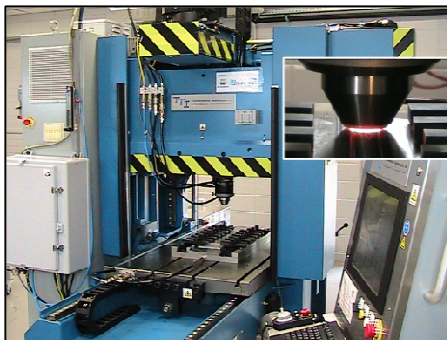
FSW system in LNLS. Right upper detail shows the friction stir welding process.
